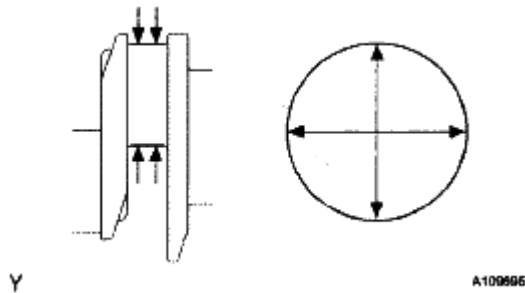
Checking Crank Pin For Taper And Out-Of Round
